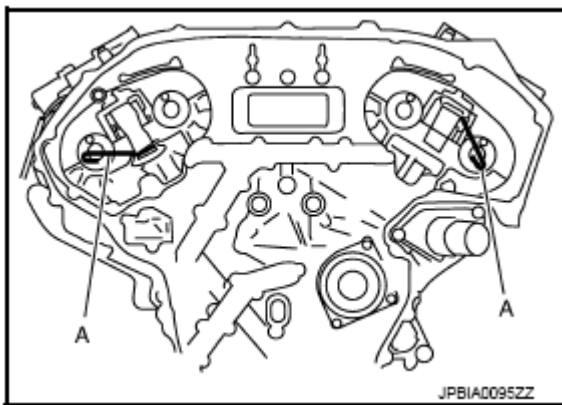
Removing Timing Chain Tensioners With Stopper Pins Attached
